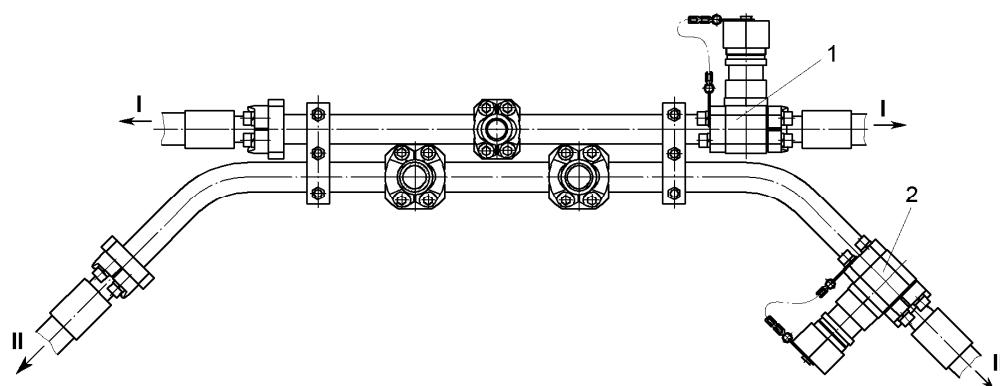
half-coupling mounting on dump truck (pump side view):
